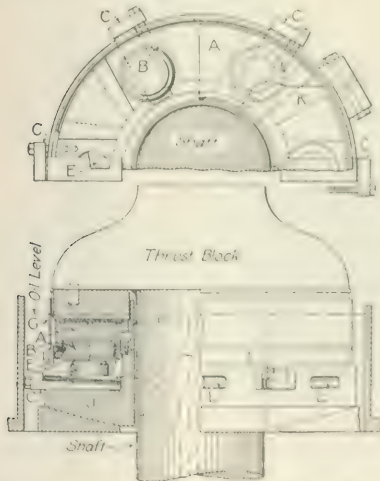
DETAILS AND GENERAL VIEW OF THE BEARING.
